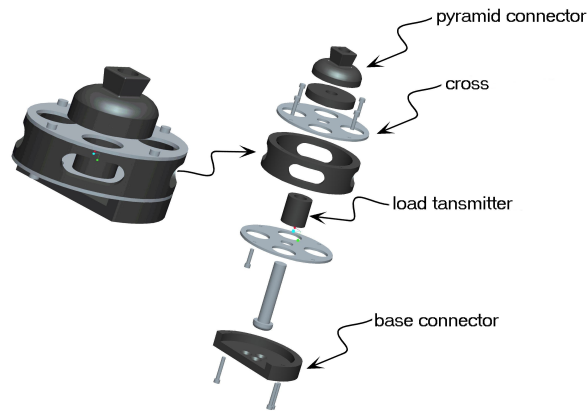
Double cross in assembled and exploded view showing the configuration of the two approximated crosses.
